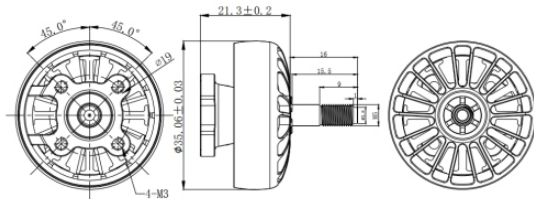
2D Drawing of the iFlight Xing X2806.5 motor
